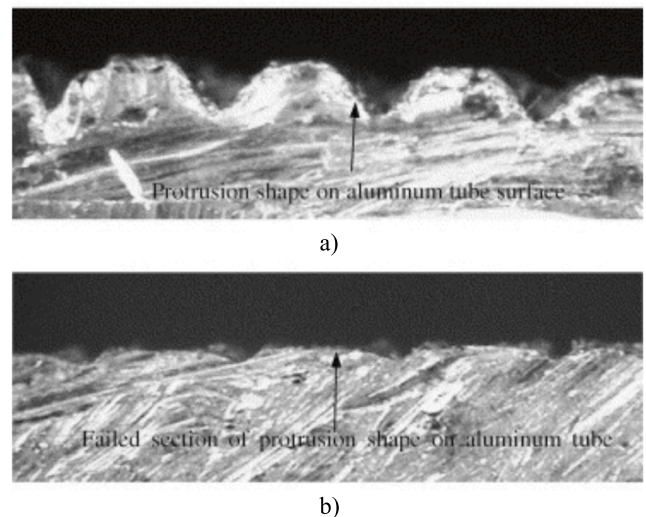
Microscope view of protrusions at 100x: (a) section view before failure; (b) section view after failure, taken from [23].
